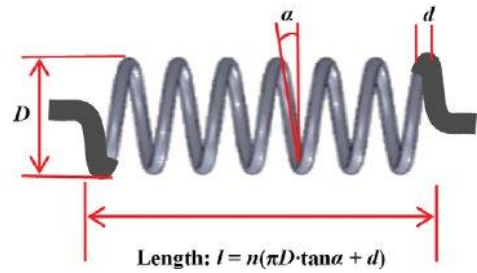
The parameters of the SMA coil spring actuator. [16]
